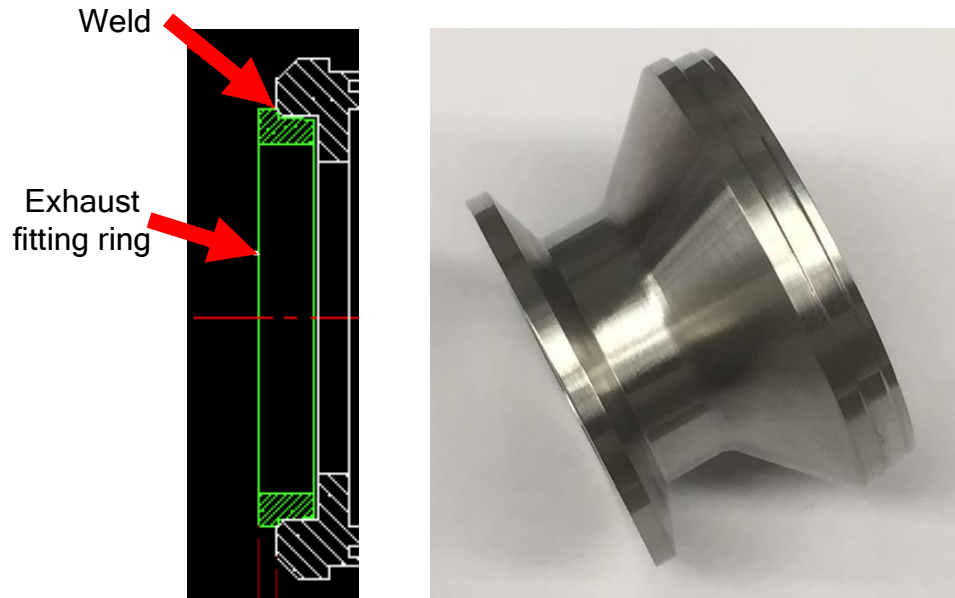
Original exhaust fitting ring design on the heater (left); Modified stainless steel 304 flange as replacement of the original exhaust fitting ring (right)
